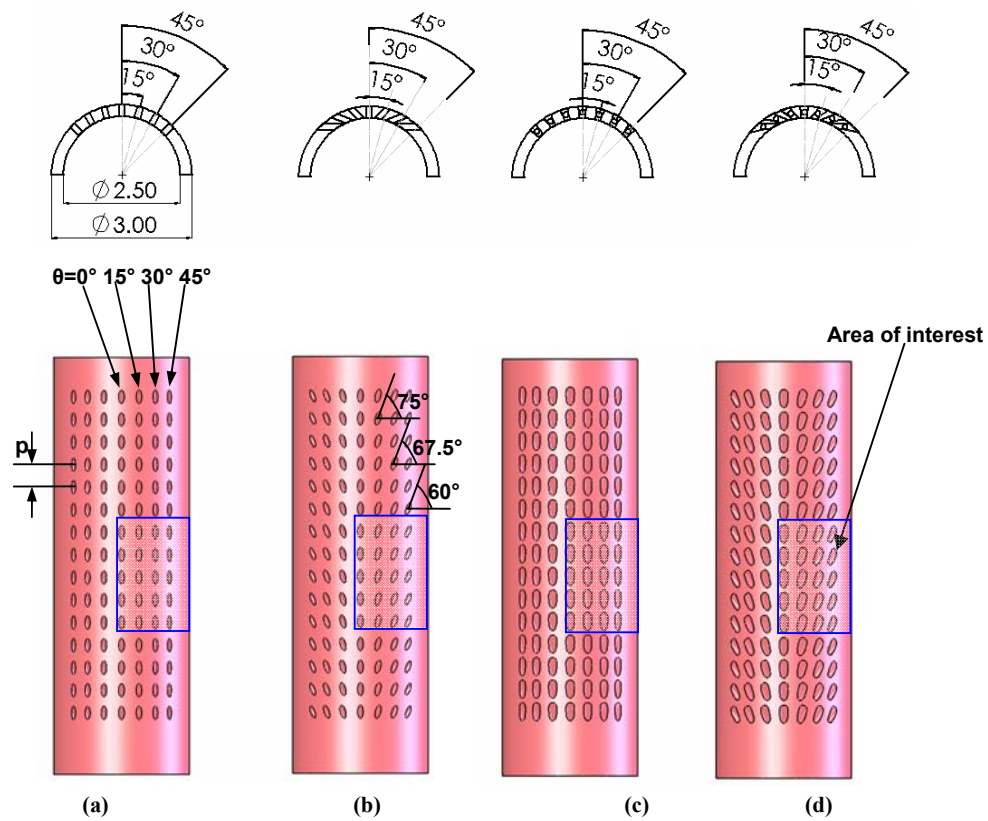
Seven-row film cooled leading edge models (a) radial angle cylindrical holes (b) compound angle cylindrical holes (c) radial angle shaped holes (d) compound angle shaped holes
